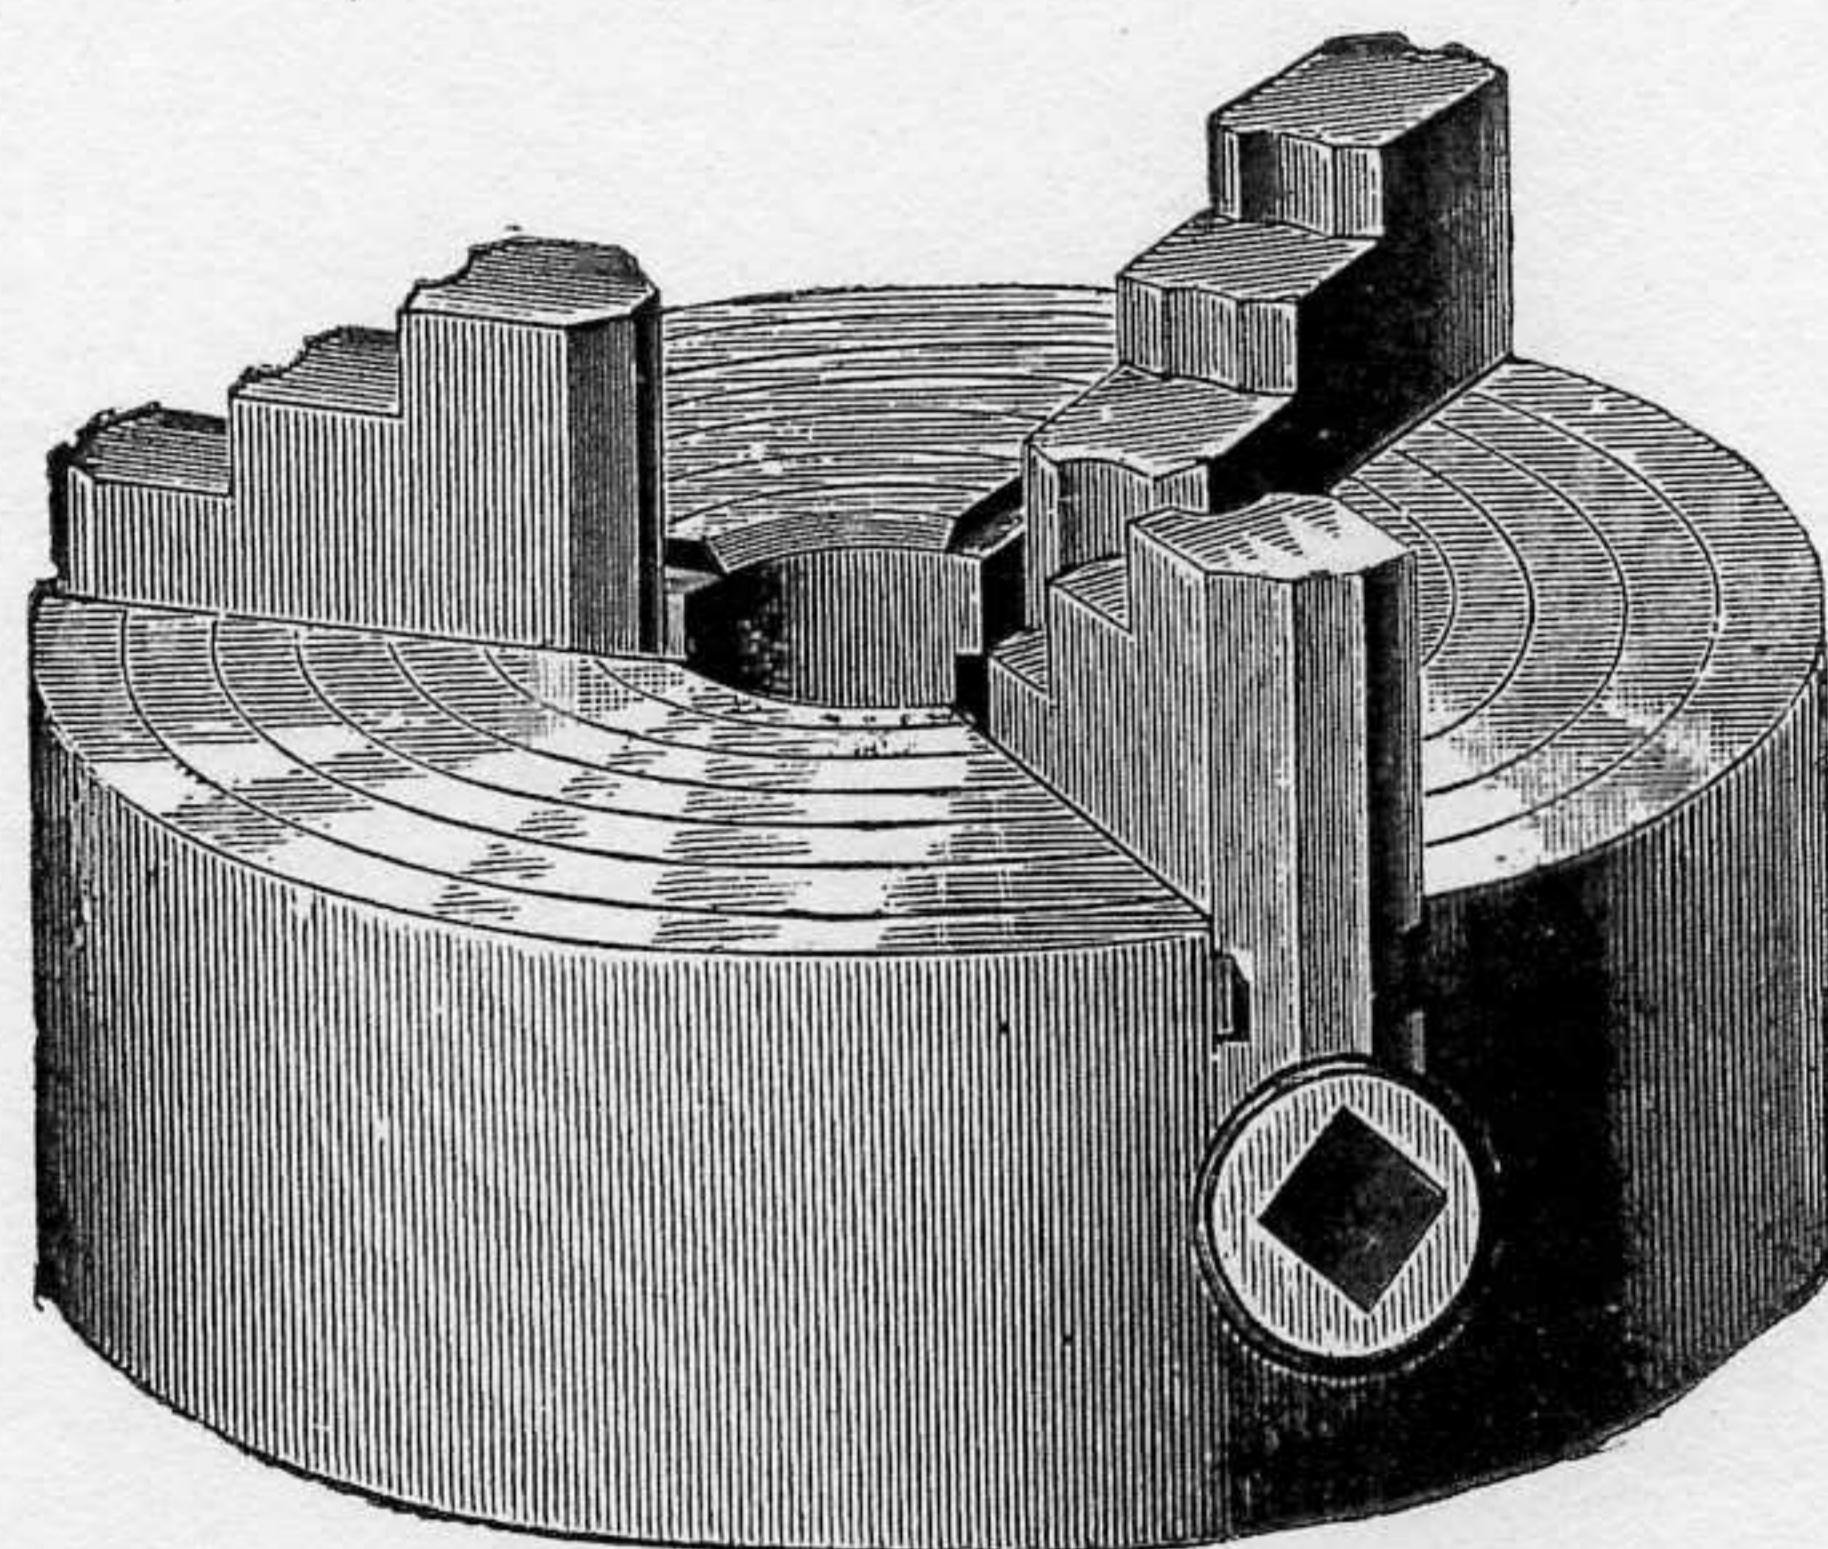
SIX-INCH THREE-JAWED CHUCKS
